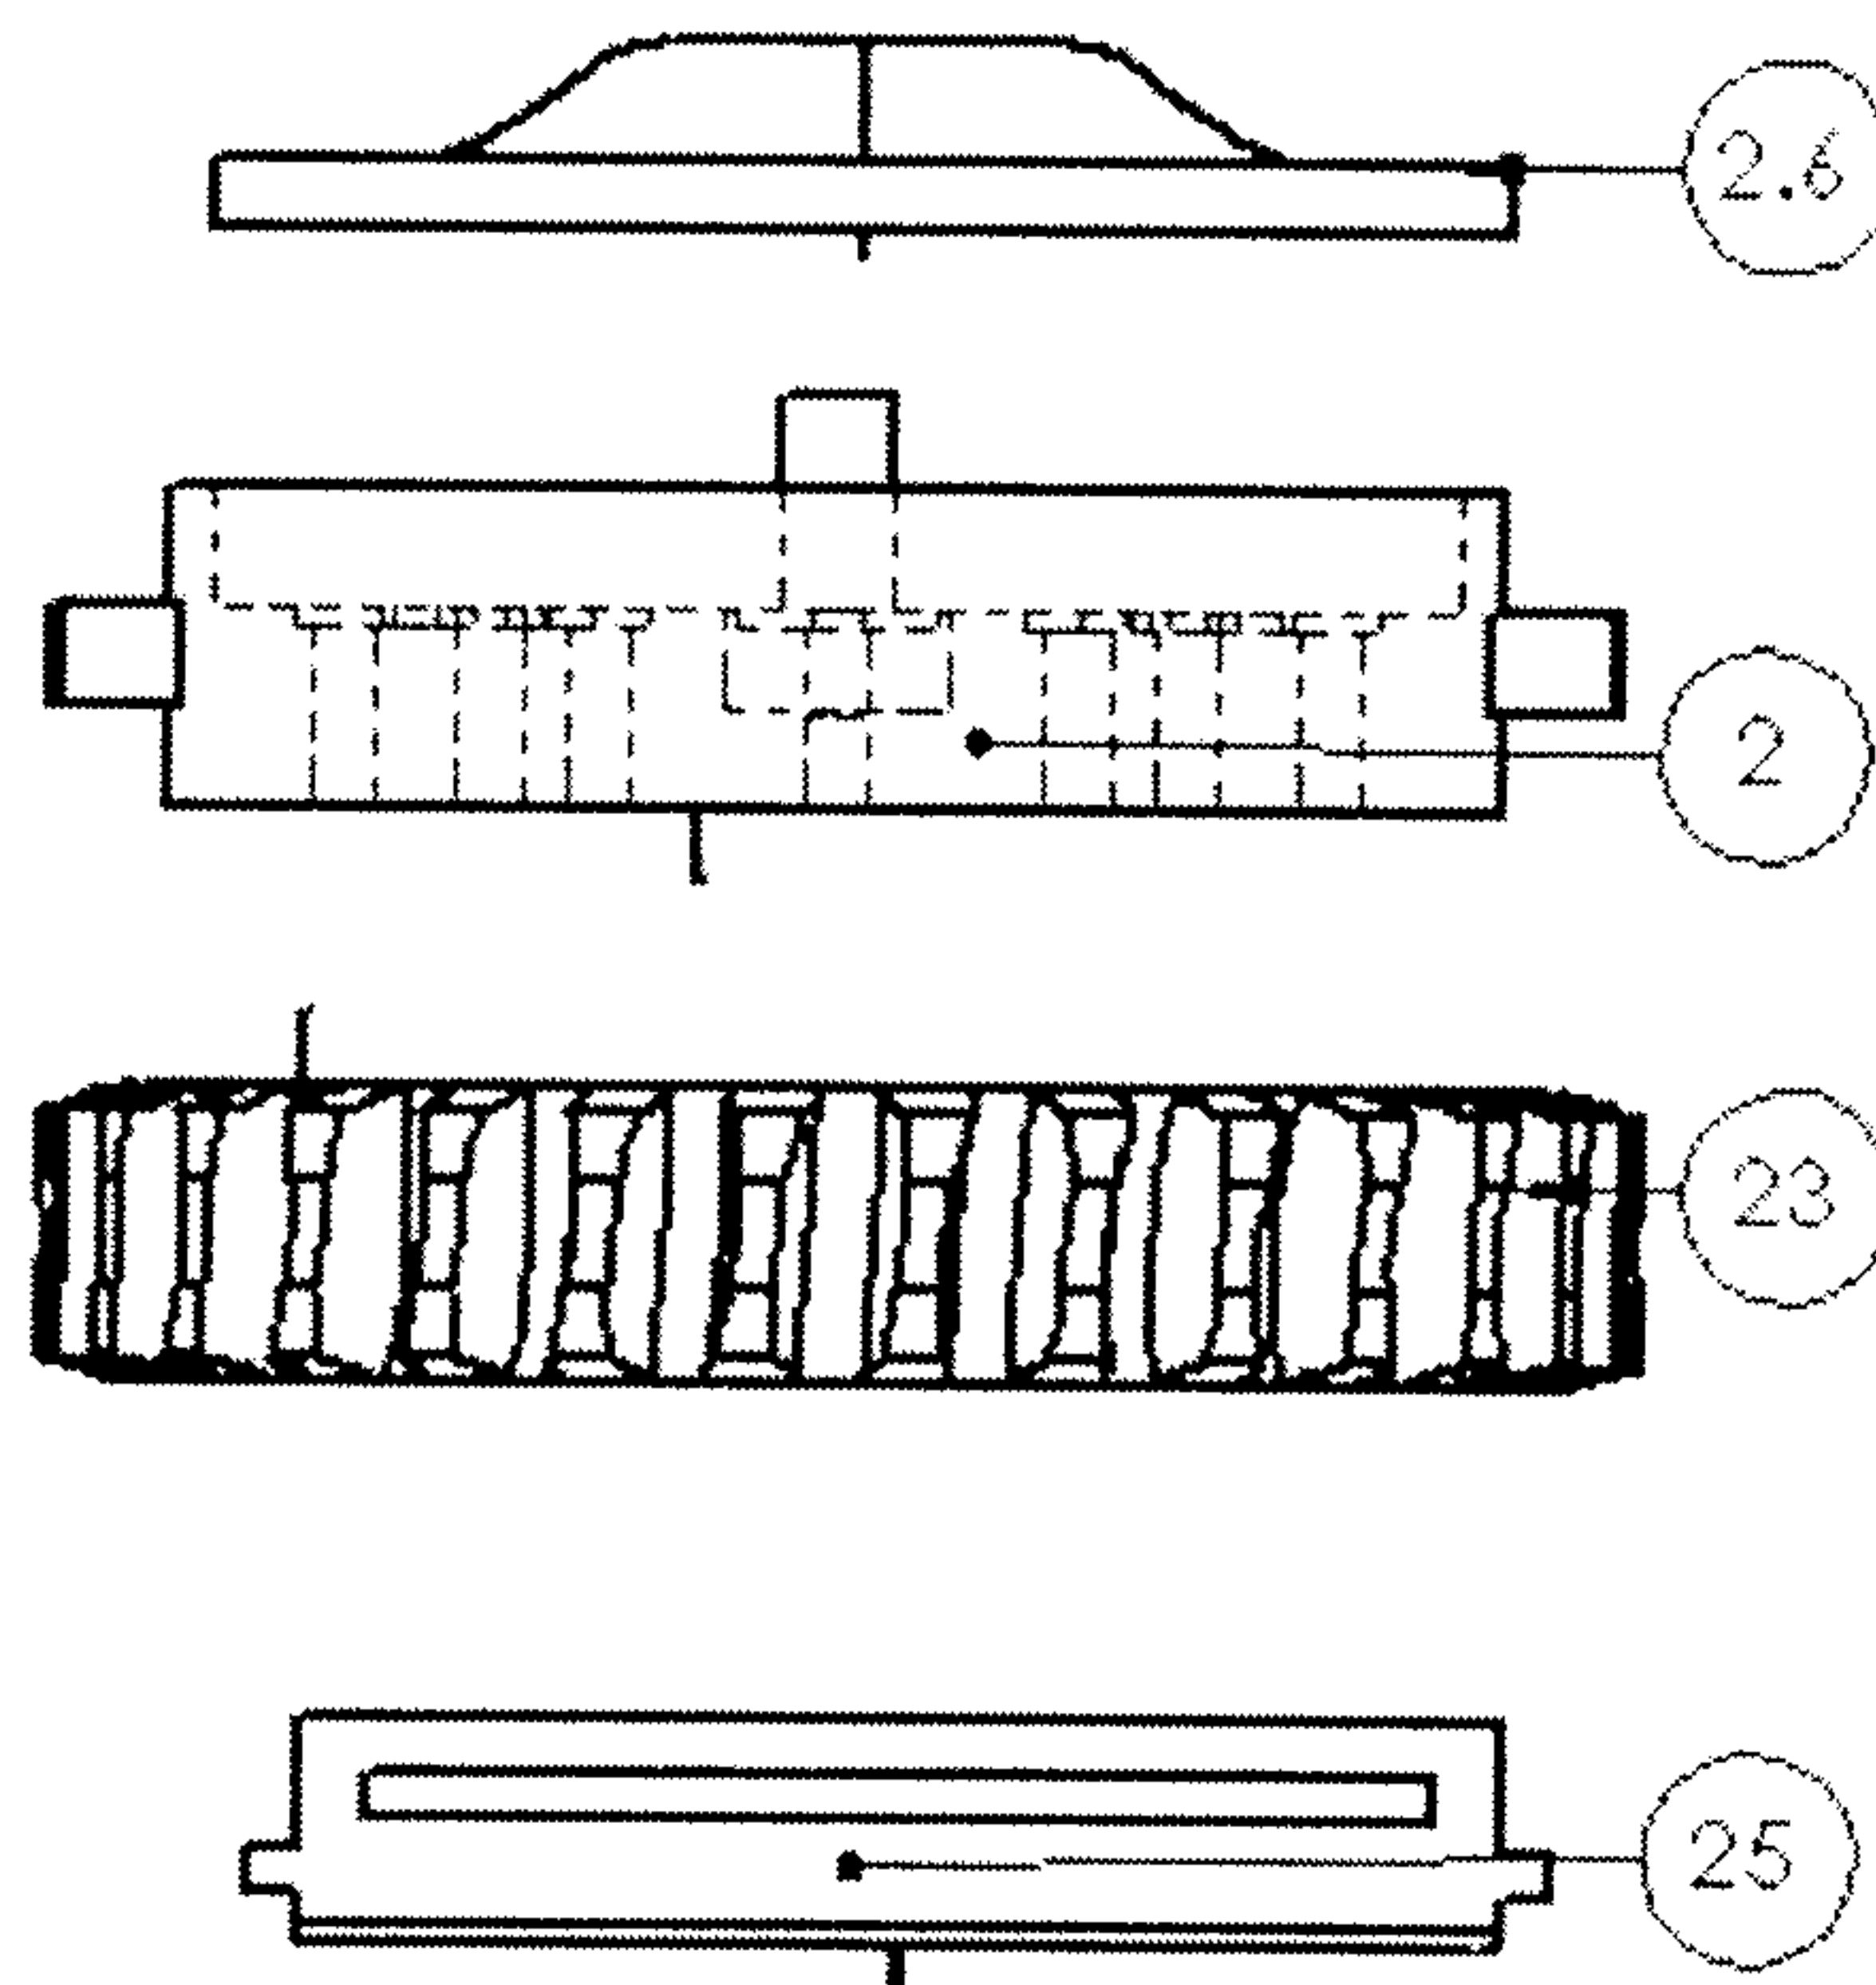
Elevated view of Top cap, Gear Ring and Tray
